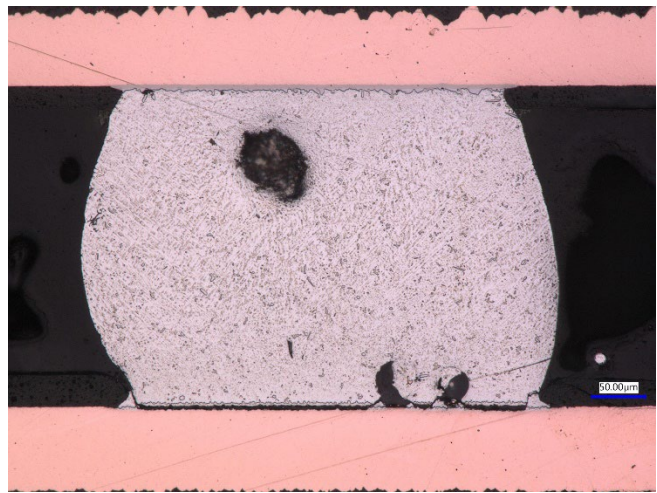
SAC305 solder joint from the After Reflow population. A fine crack has propagated through the IMC layer, between the IMC and bulk solder and between the IMC and nickel layer located near the component side pad.
